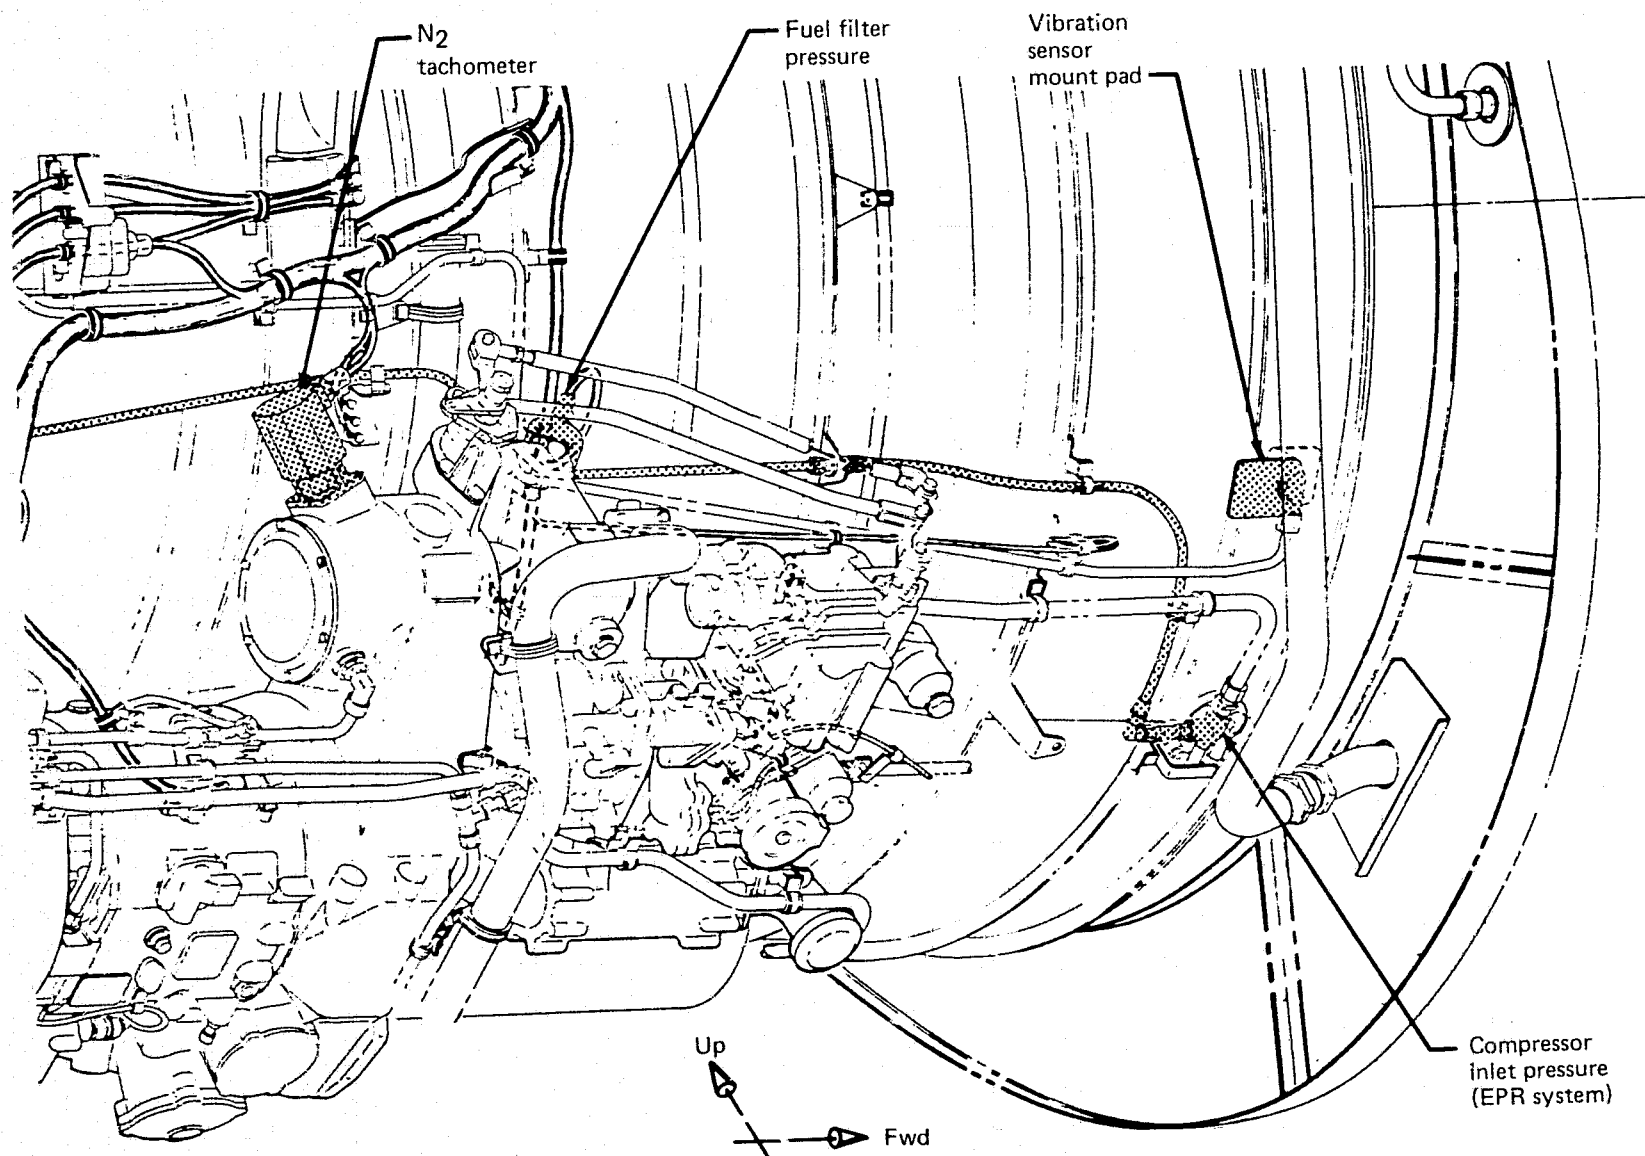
JT8D Refan Engine Instrumentation Installations—Lower Right-Hand Side
